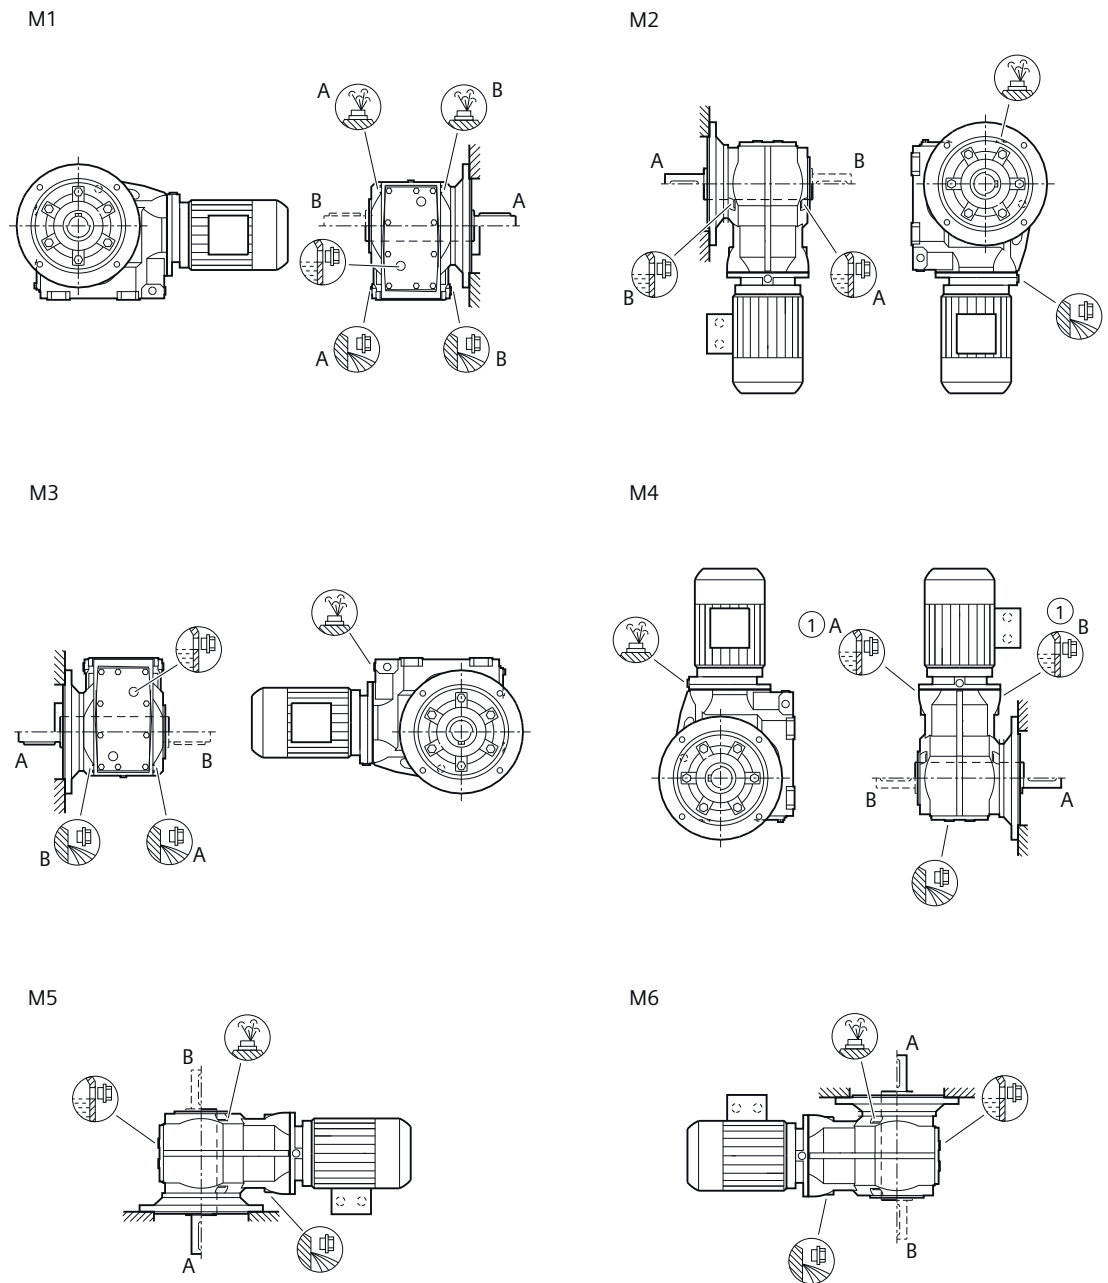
Mounting positions for bevel gearbox K.F flange-mounted design and KAZ with housing flange, sizes 39 - 189
